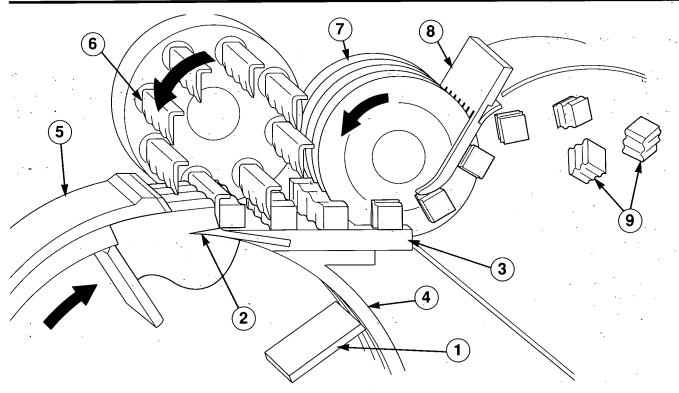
Cutaway view of the dicing unit (Model GK-A). (1) Impeller (191 RPM), (2) Slicing Knife, (3) Slicing Knife Holder, (4) Slice Case, (5) Adjustable Case Gate, (6) Crosscut Knives (1395 RPM), (7) Circular Knives (1594 RPM), (8) Stripper Plate, (9) Product.
